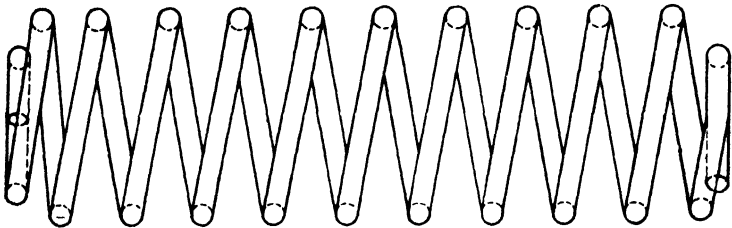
COIL-TYPE VEHICLE-SUSPENSION SPRING.
